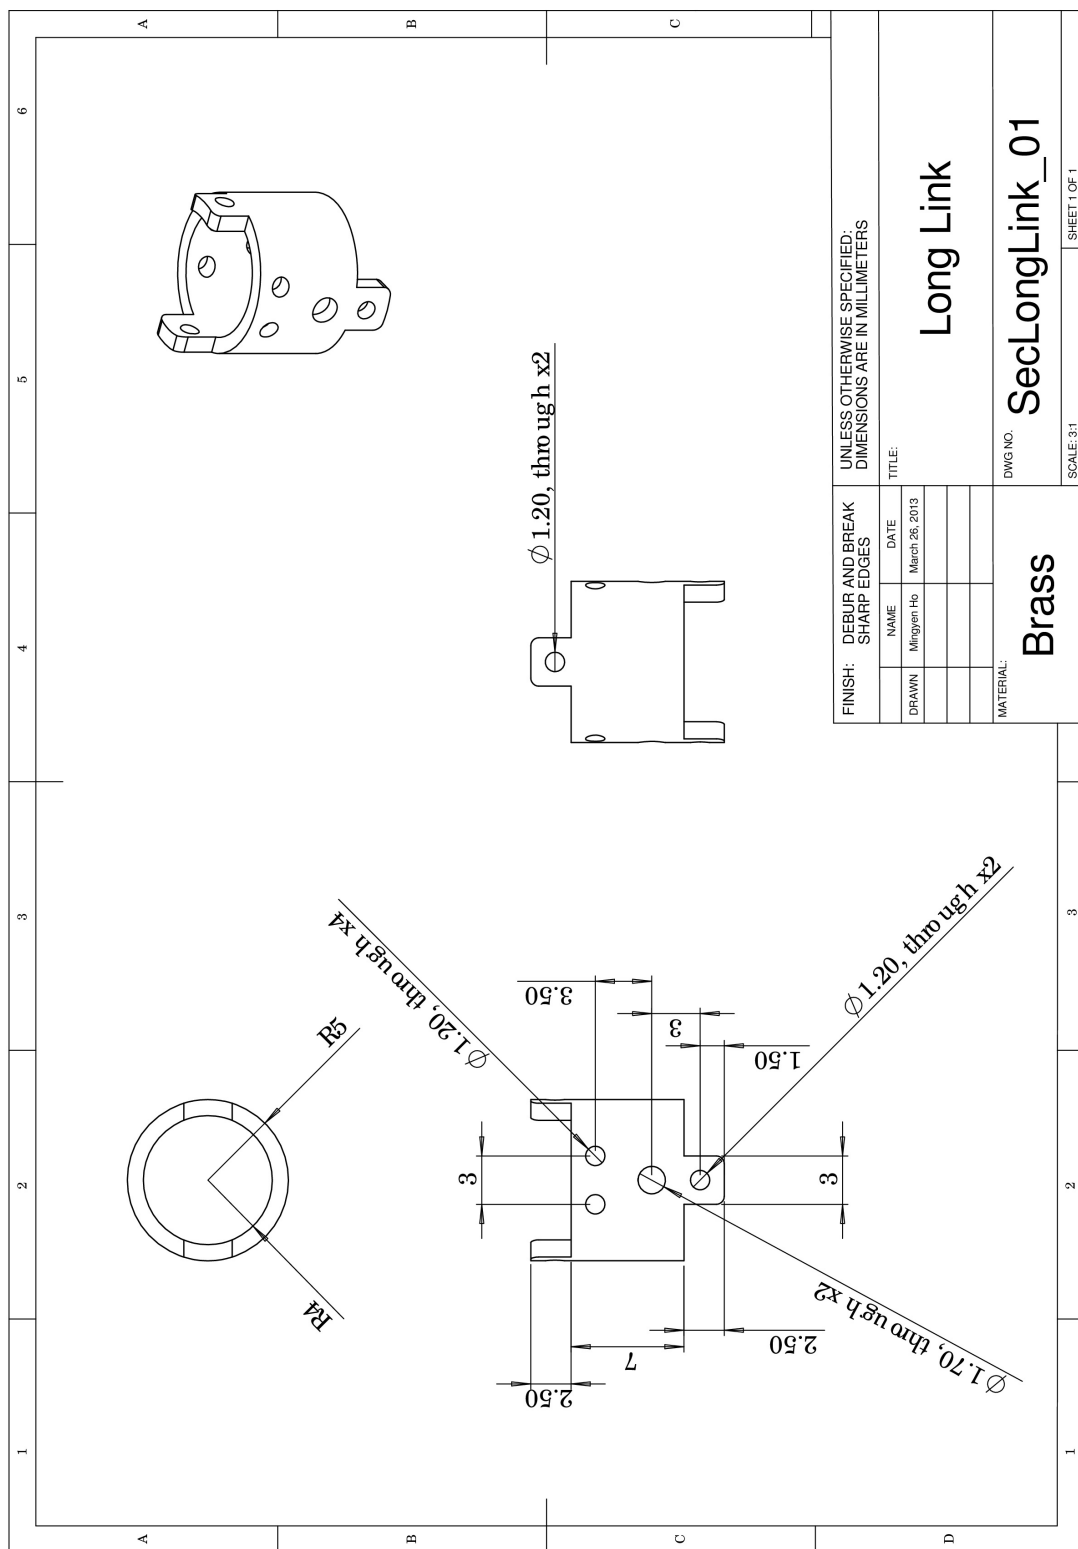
Engineering drawing of the long link of the SMA wire actuated MINIR.
